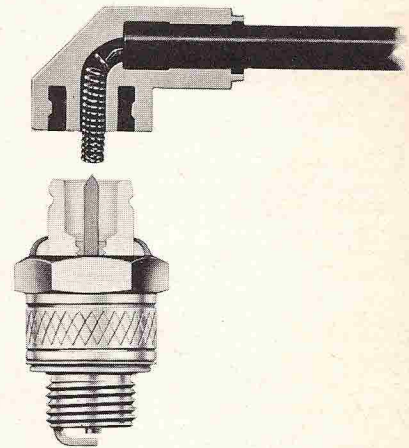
Cut-away view of special "shorty" type spark plug and terminal available for chain saw engines. Refer to Fig. CS29A for a second type special plug.
